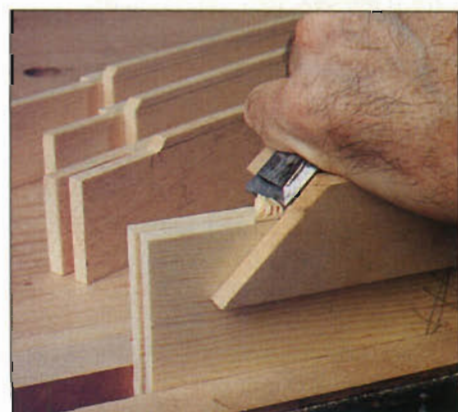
Photo P: Cut the miter at the new end of each rabbet shoulder using a sharp chisel and the 45° miter template. Take thin cuts so joints fit snugly when assembled.
